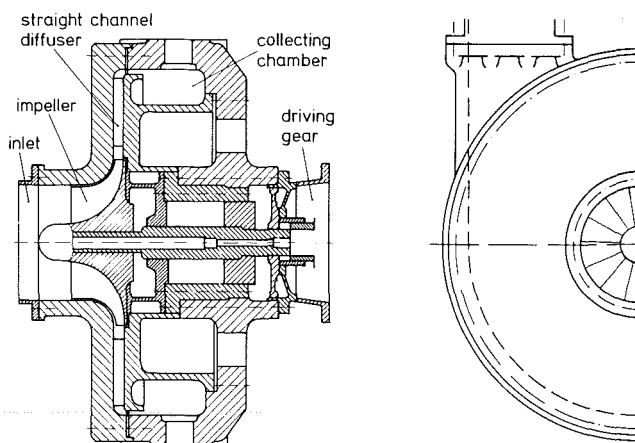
Cross-sectional view of the test compressor with straight channel diffuser
